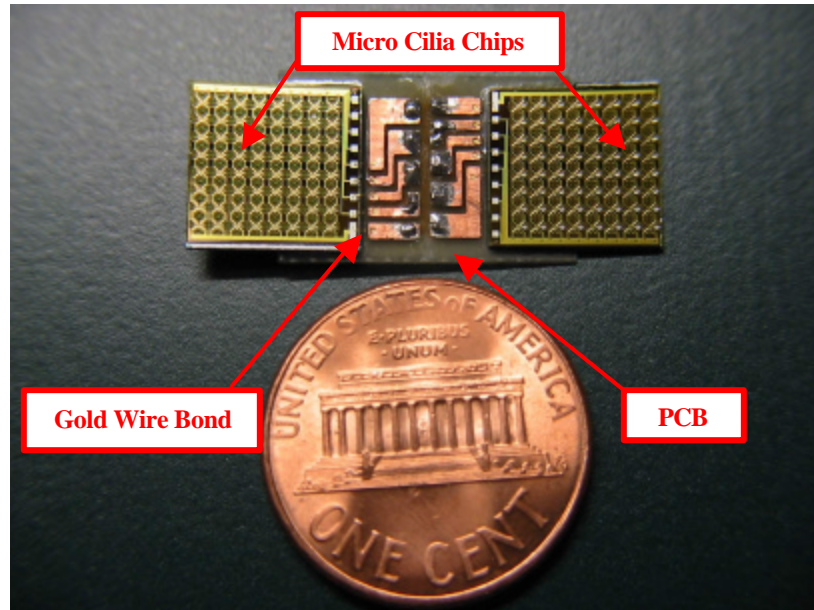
Bottom view of the microrobot. The printed circuit board (PCB) bonds two micro cilia array chips. The contacts on the PCB electrically connect to two chips via gold wires.
